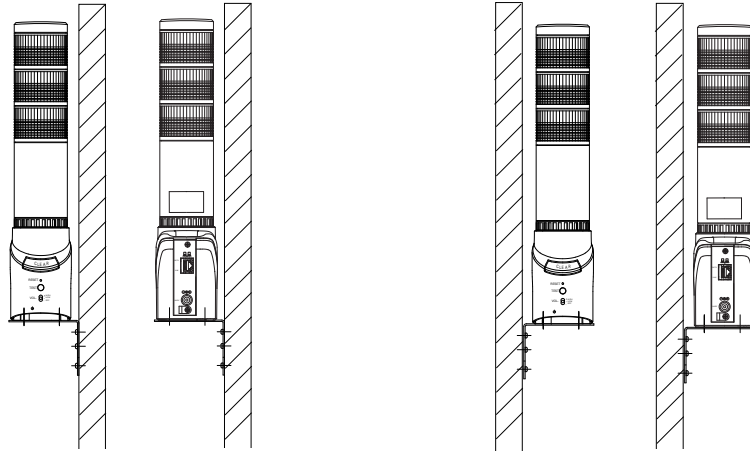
Wall Mount Surface Bracket Figure
